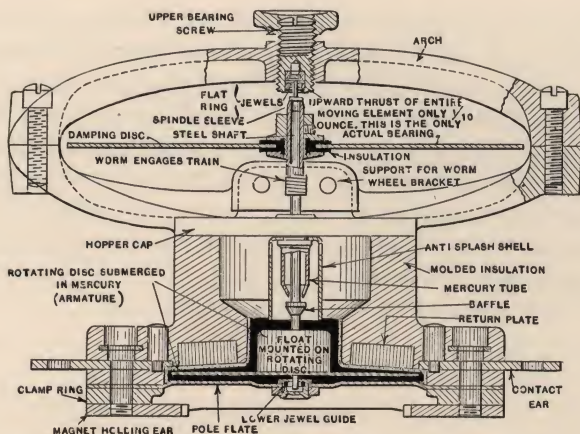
Cross-section of mercury-motor element of Sangamo Type D-5 watt-hour meter showing bearing system.
